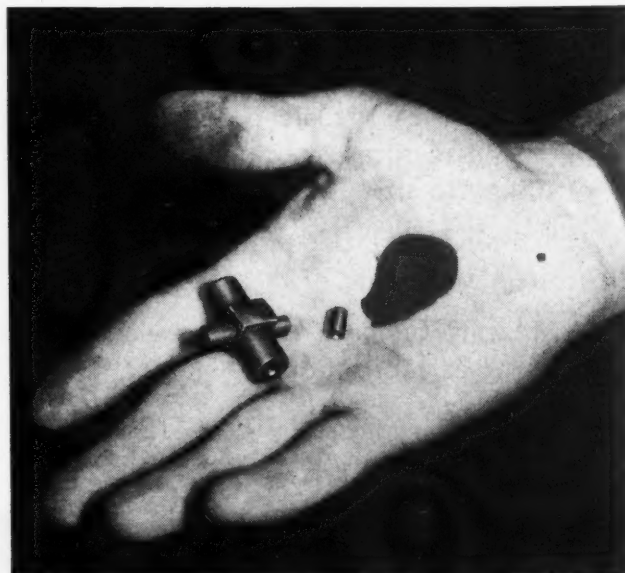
Carbon Die Used in Strauss Press to Produce Cylindrical Piece (Center) from Powdered Metal (Right)
